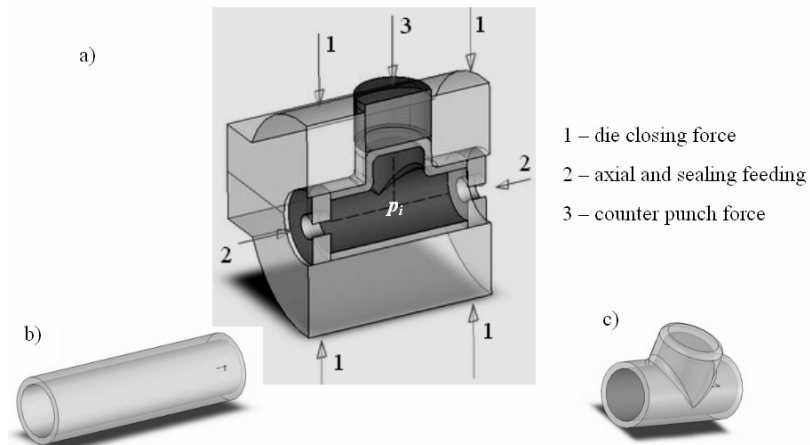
The hydroforming principles: a – tool setup, b – initial tube, c – final product (T-joint)
